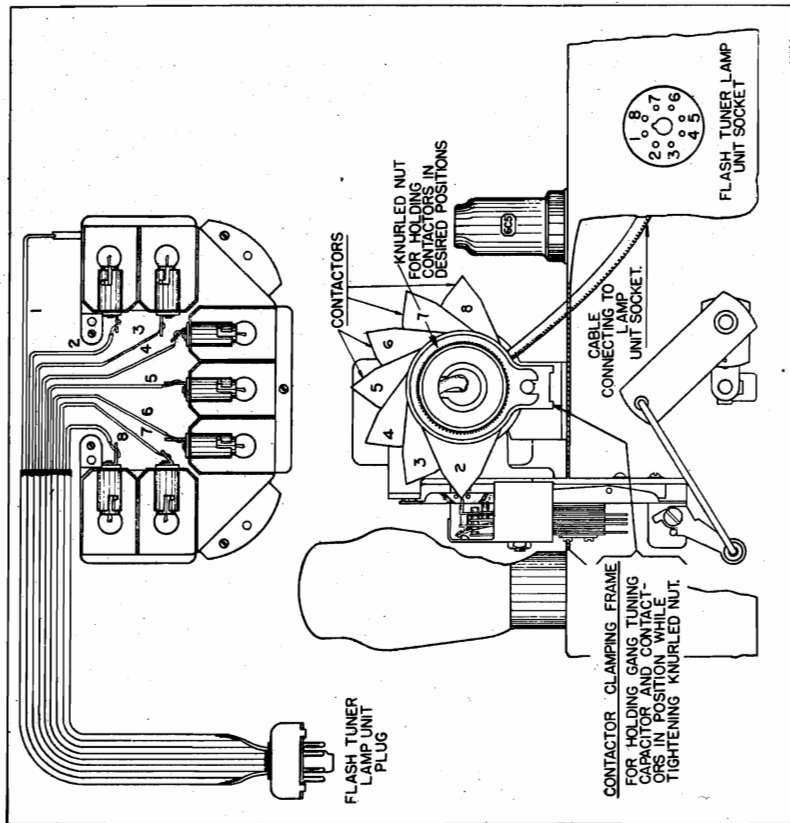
Showing Flash Tuner Lamp Unit with Escutcheon Plate Removed (Top Figure) and Rear View of Receiver Showing Flash Tuner Mechanism (Bottom Figure).
